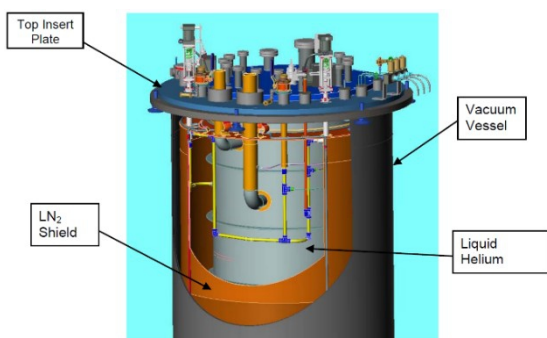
Schematic of VTS Cryostat Assembly.
